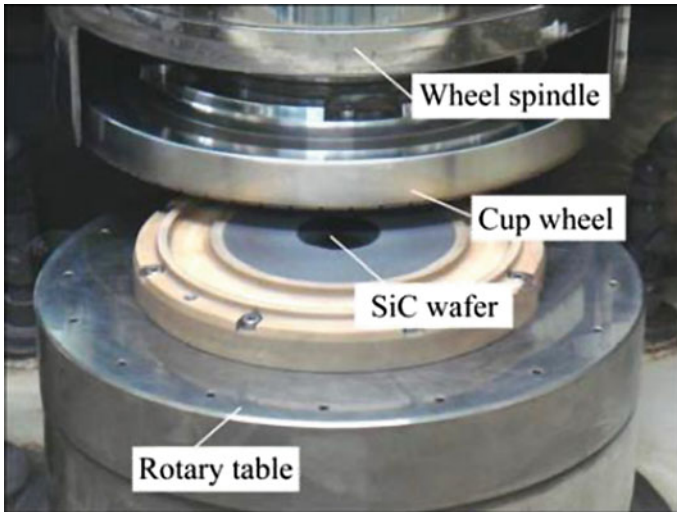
Ultraprecision machine set-up for Nanogrinding [58]
